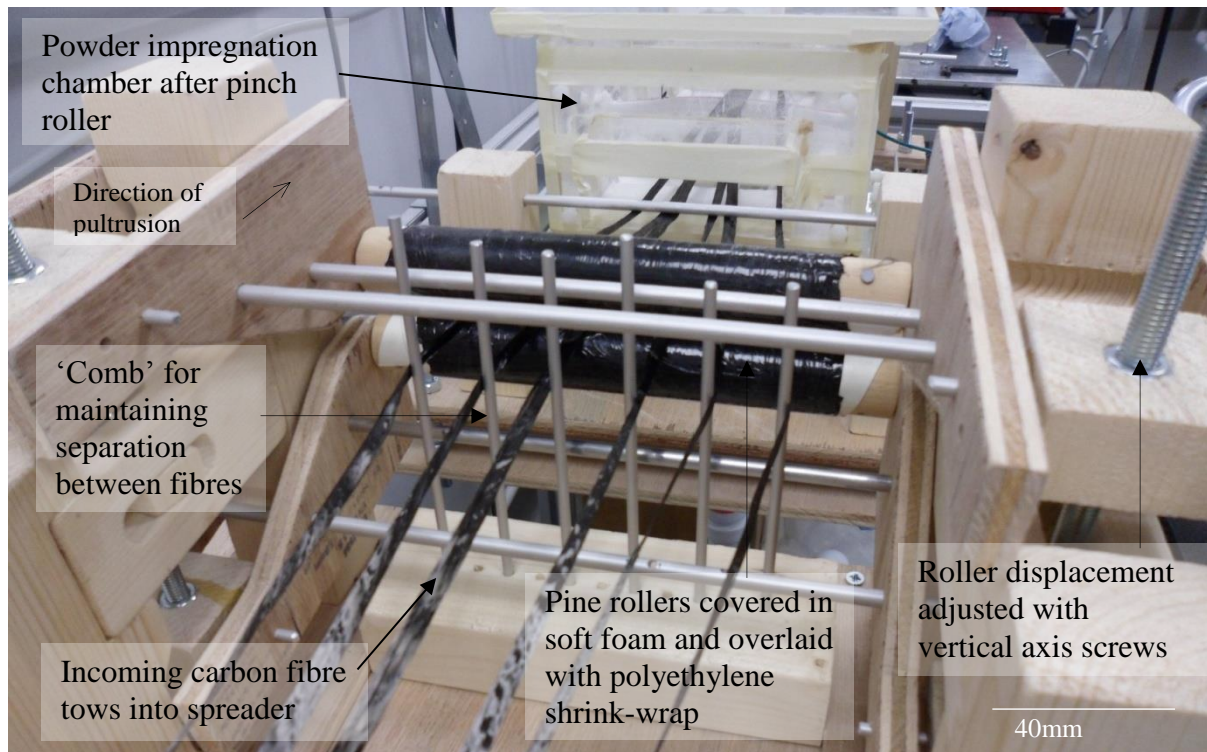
View of fibres leaving pinch rollers and entering powder spray chamber.
